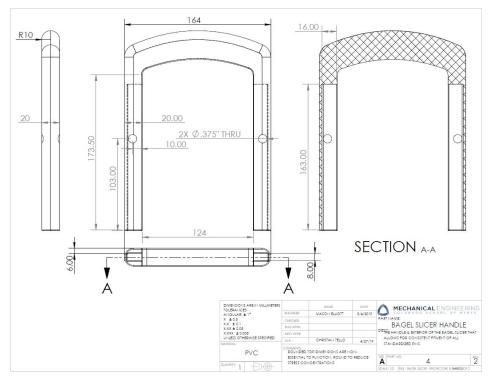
CAD Drawing of the Bagel Guillotine Handle
